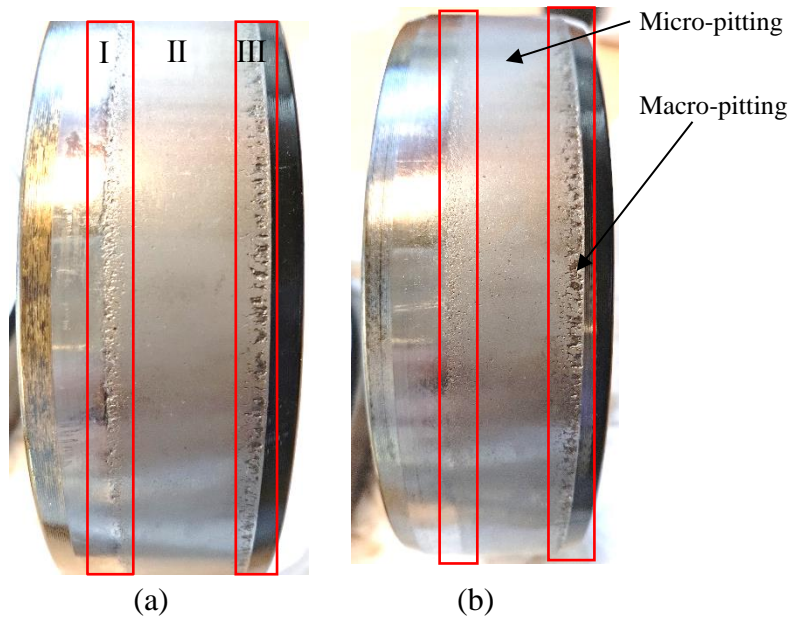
Macro-pitting and micro-pitting are observed on the surface of inner ring raceway, (b) is the back side of (a). The surface damage at the end of raceway I & III (macro-pitting) is more serious than the middle part II (micro-pitting or frosting). Moreover, the macro-pitting damage on the right side III is severer than the left side I.
